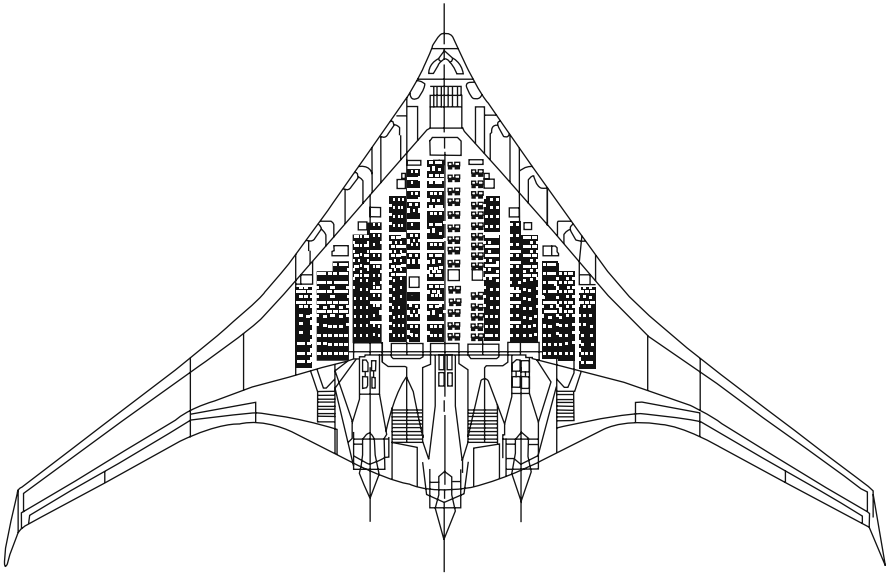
General arrangement plan of blended wing aeroplane concept
